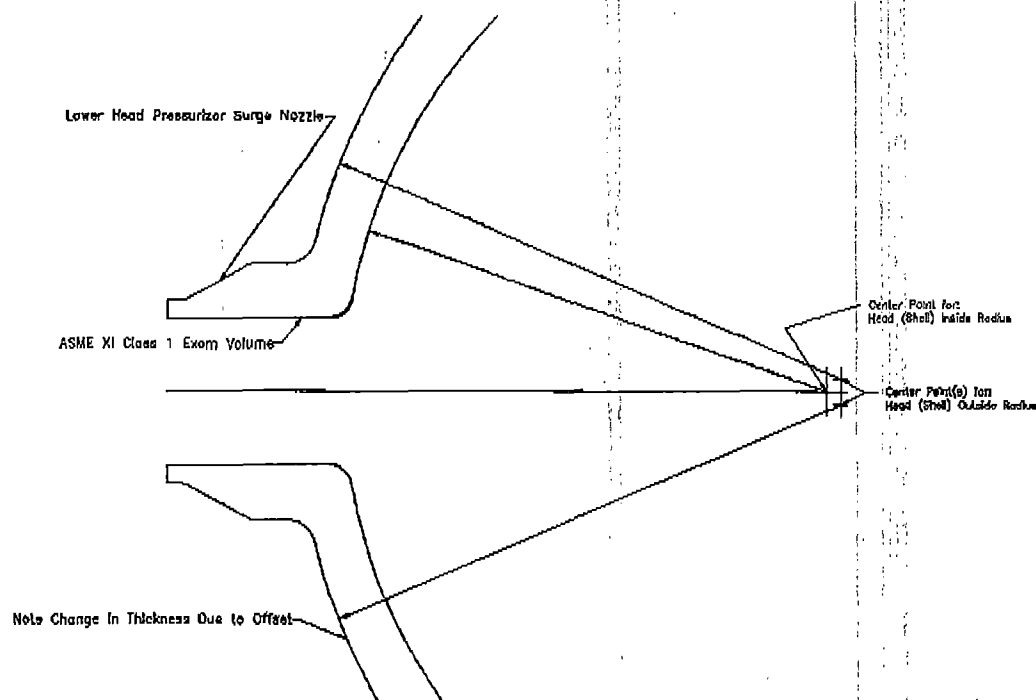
Westinghouse Pressurizer Lower Head Sketch with Offsets
